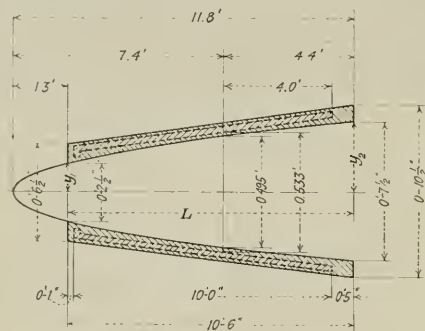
ROUGH CENTRIFUGAL CASTING FOR MACHINING TO DIMENSIONS SHOWN IN FIG 1
